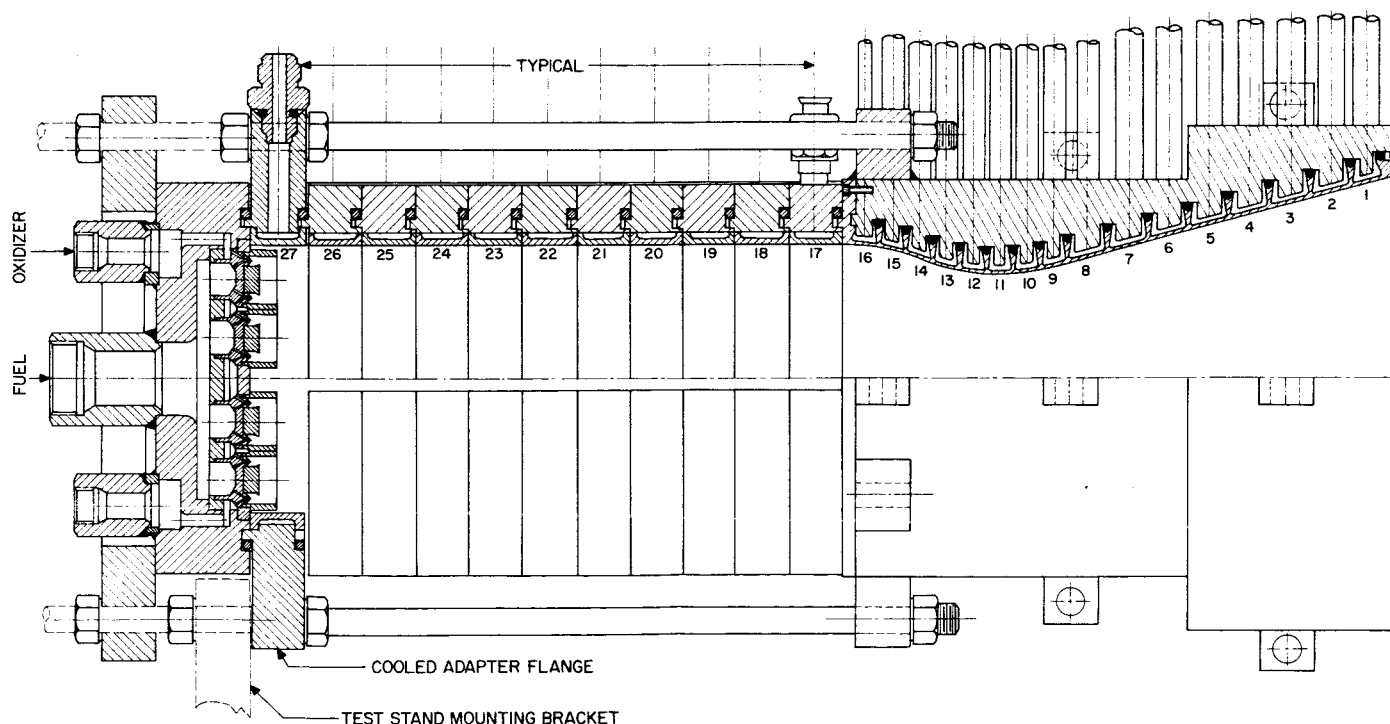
Assembly of sectional water-cooled motor and nozzle with multi-element Injector 62721
